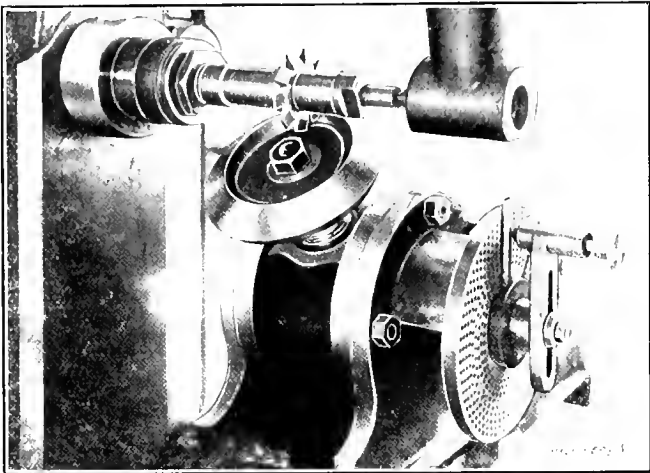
Work in Place on Machine, Ready for Trial Cut.
